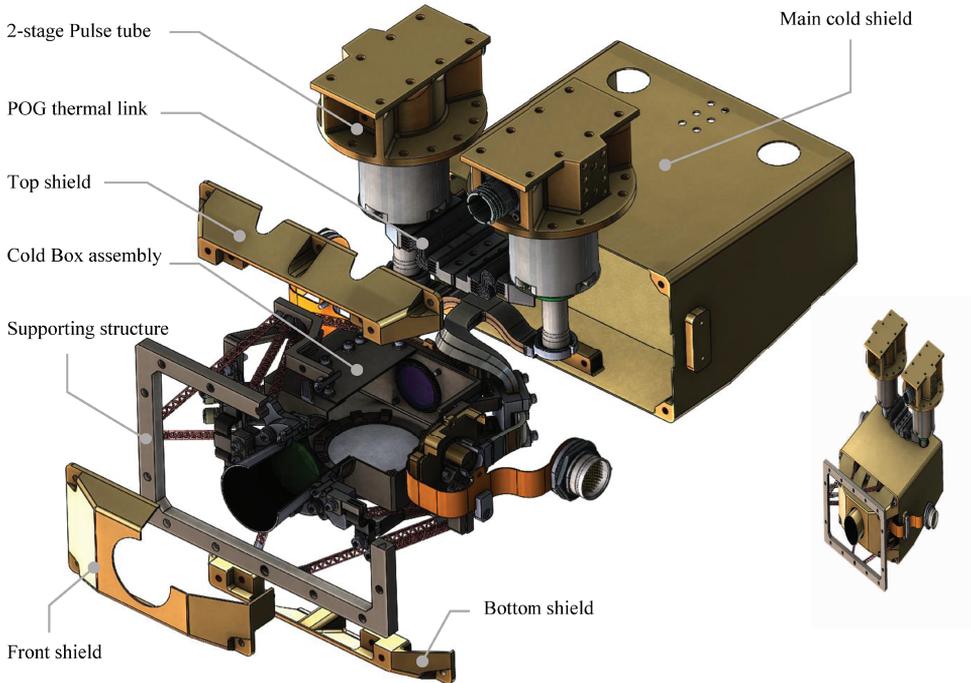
Exploded view of the optical bench assembly and assembled view in miniature
